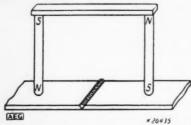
Diagram illustrating method of mag netizing the test specimen.
